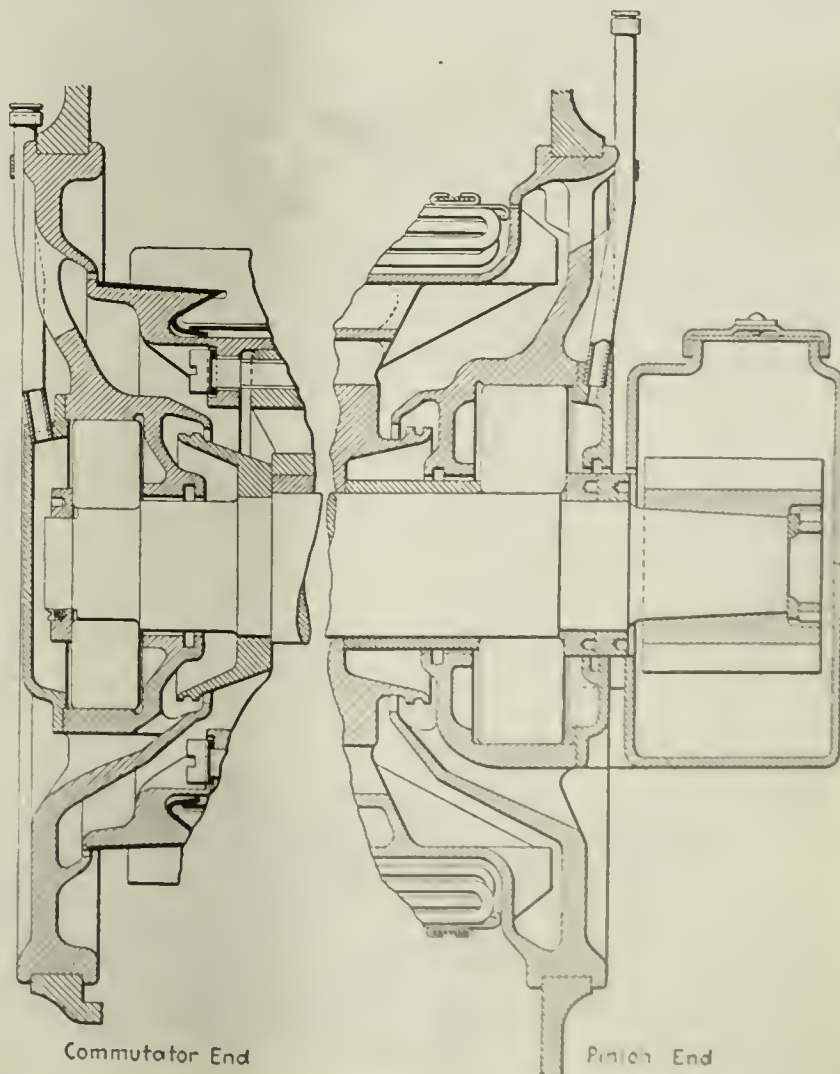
TYPICAL BALL-BEARING MOUNTINGS FOR COMMUTATOR AND PINION ENDS OF MINING MOTORS
